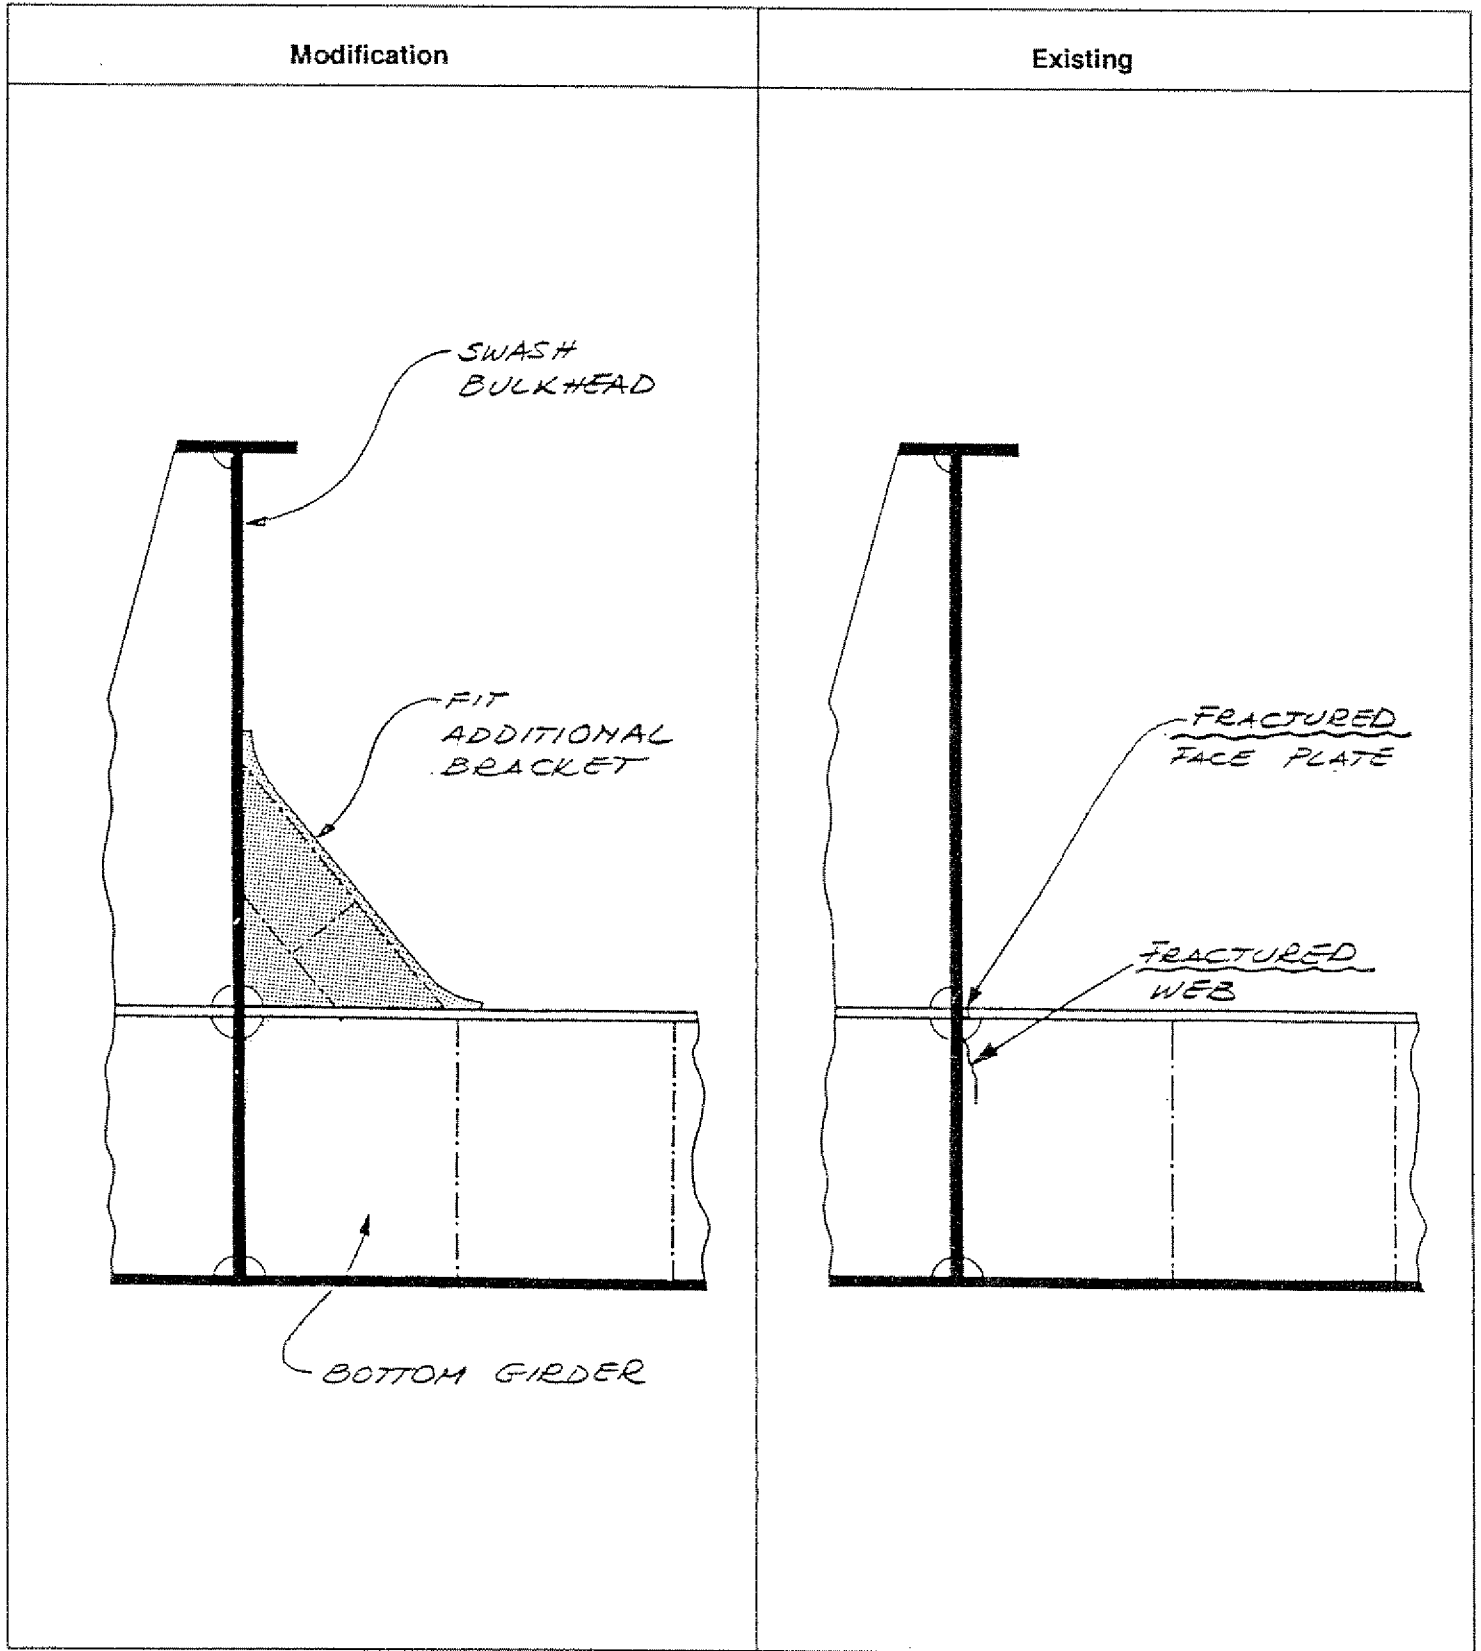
(a) Connection of Bottom Girder and Swash Bulkhead
